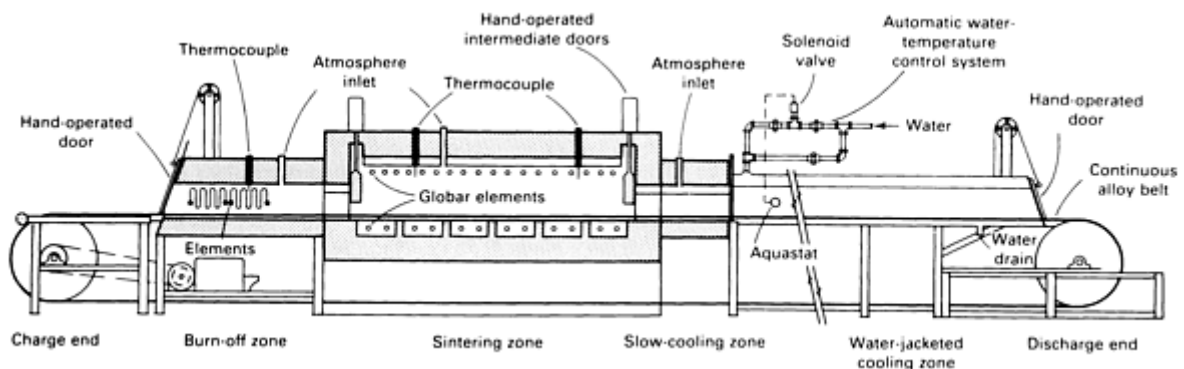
CONTINUOUS-TYPE BRAZING FURNACE WITH WATER-JACKETED COOLING CHAMBER FOR USE IN AIR OR CONTROLLED ATMOSPHERES
